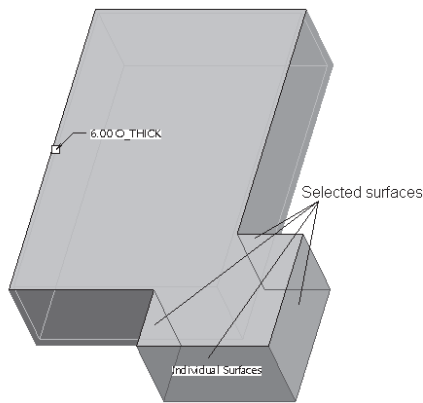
Creating shell by excluding surfaces Figure 8-33 Shell created after excluding surfaces
